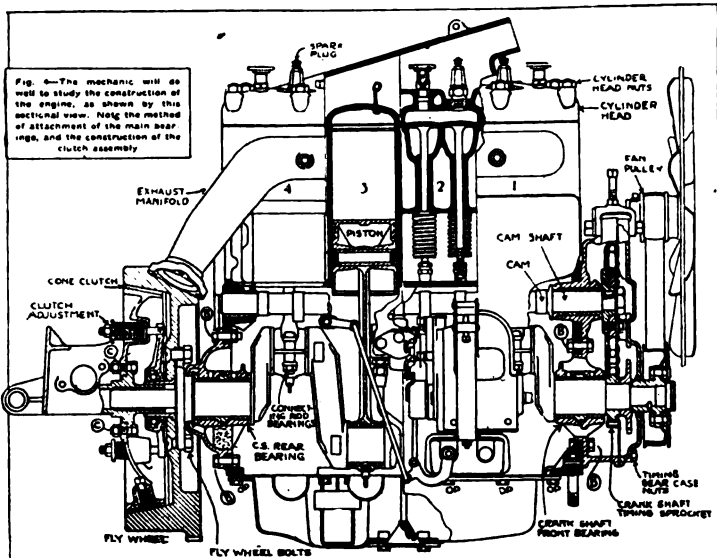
The mechanic will do well to study the construction of the engine, as shown by this sectional view. Note the method of attachment of the main bearings, and the construction of the clutch assembly.
